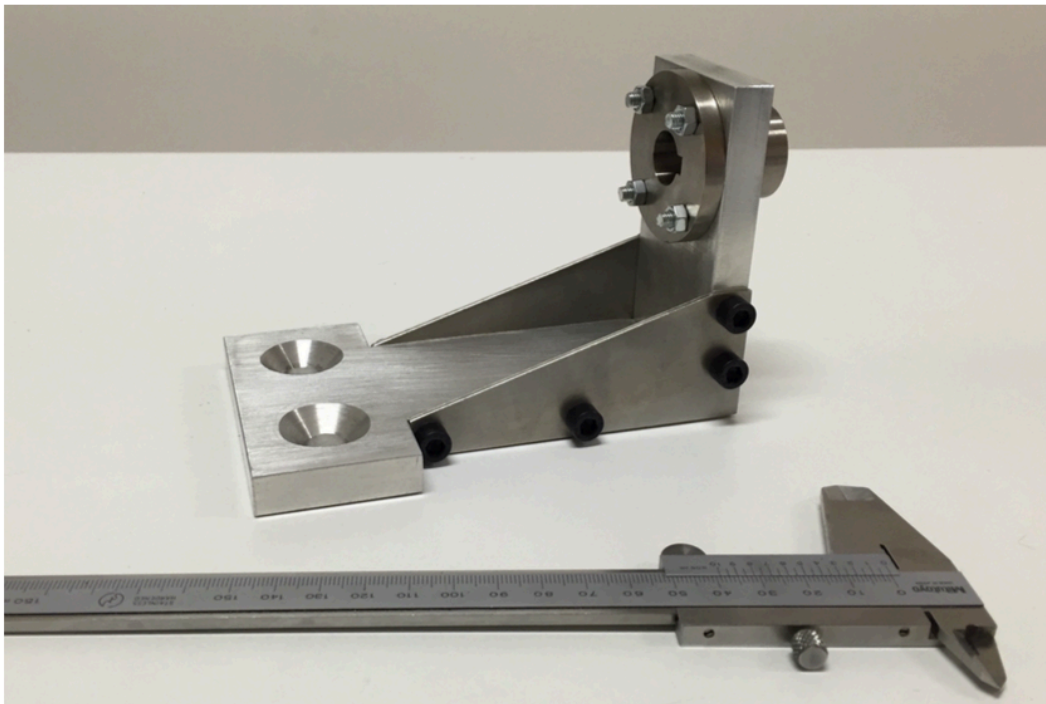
Link 3* shaft-link interface assembly, shaft holder installed.
